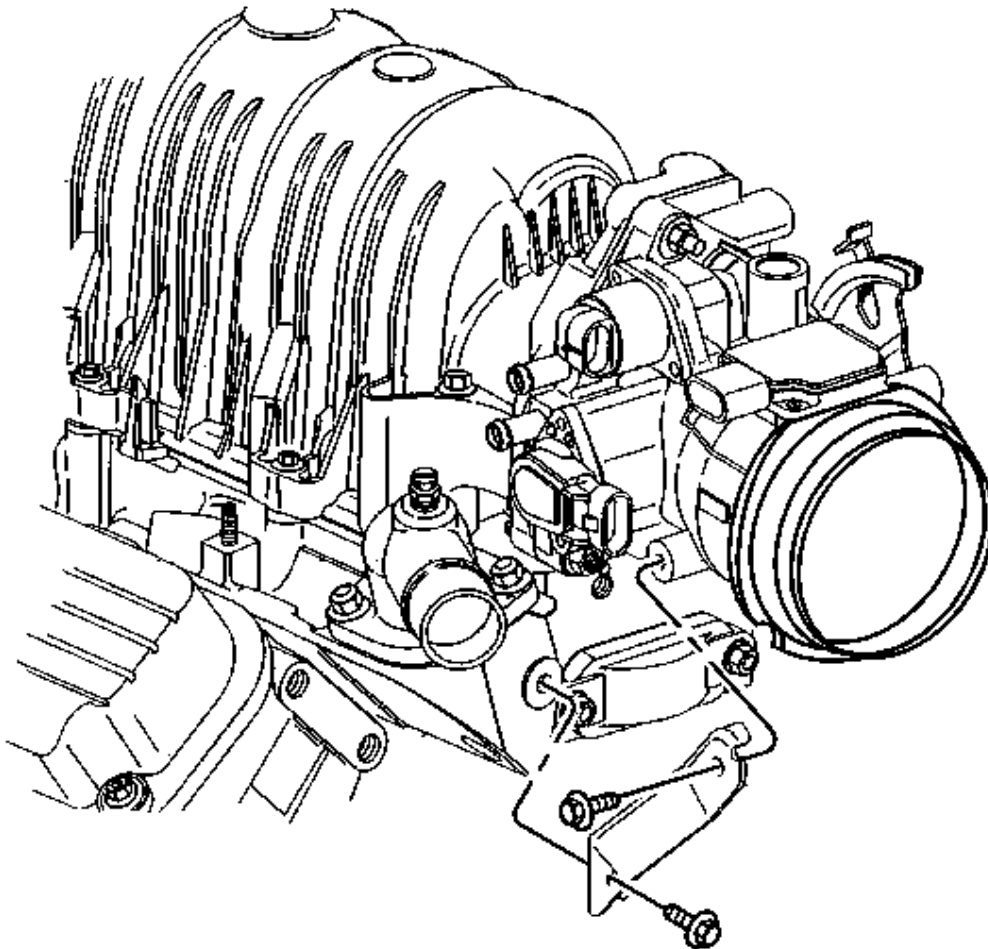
Removing Throttle Body Support Bracket Upper Bolt
